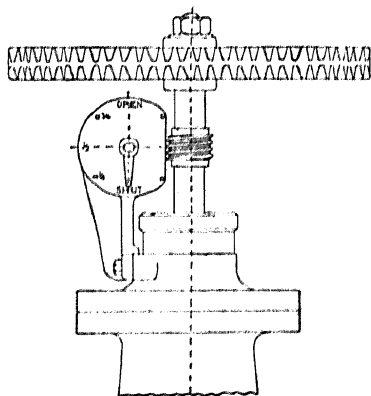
Indicator used for Valves fitted with Internal Screws
